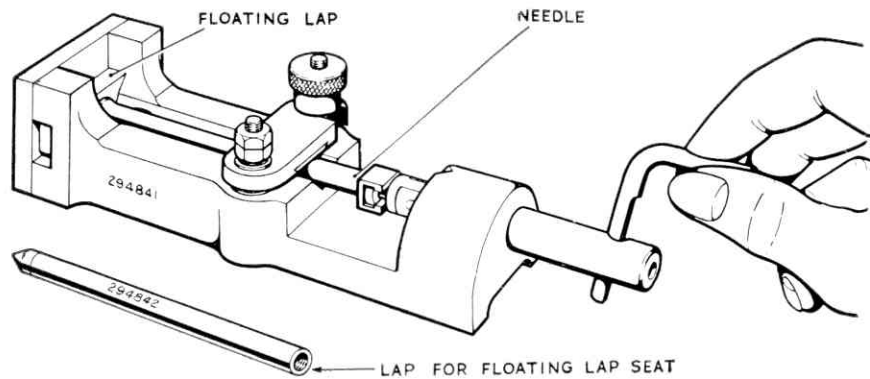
INJECTOR NEEDLE LAPPING JIG
